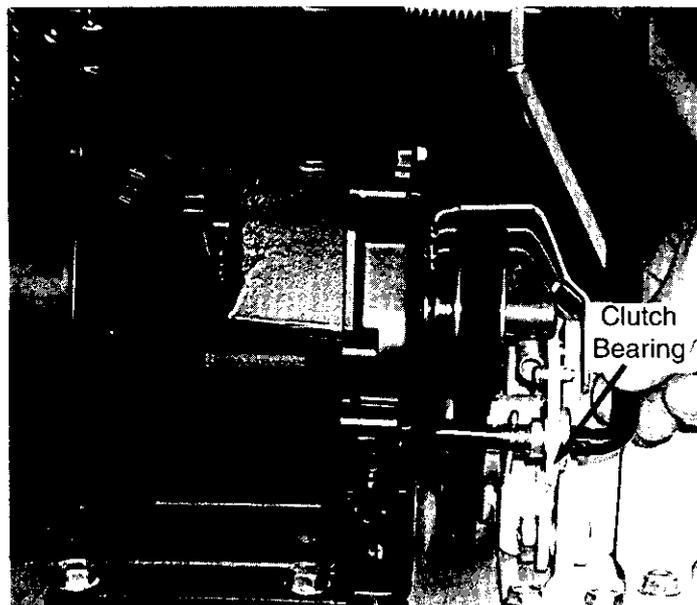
Put the bend end of the rod through the hole of the idler bracket. Secure later with a cotter pin.
